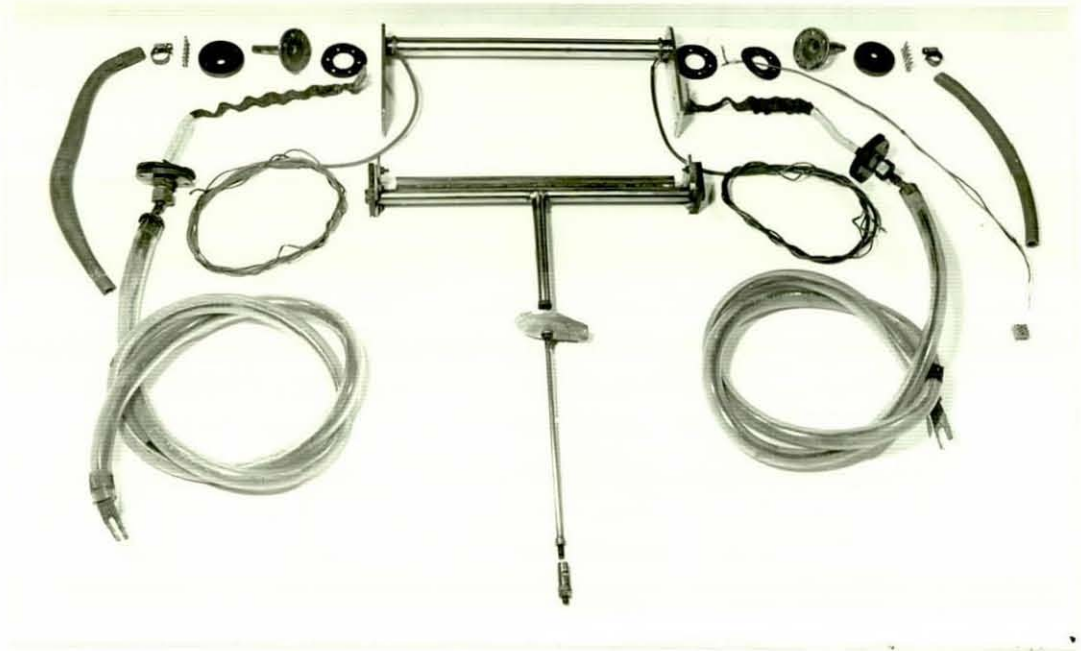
Exploded Assembly of Copper tube and Yoke and Photograph of
